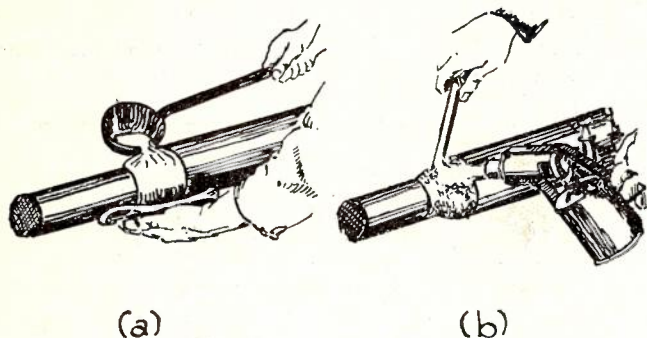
Showing method of applying Solder for (a) "Pot" Wipe.
